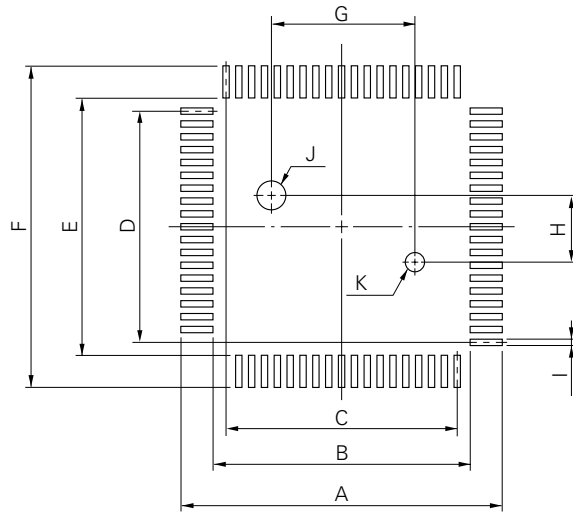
Socket Drawing of EV-9200G-74 (Reference)
